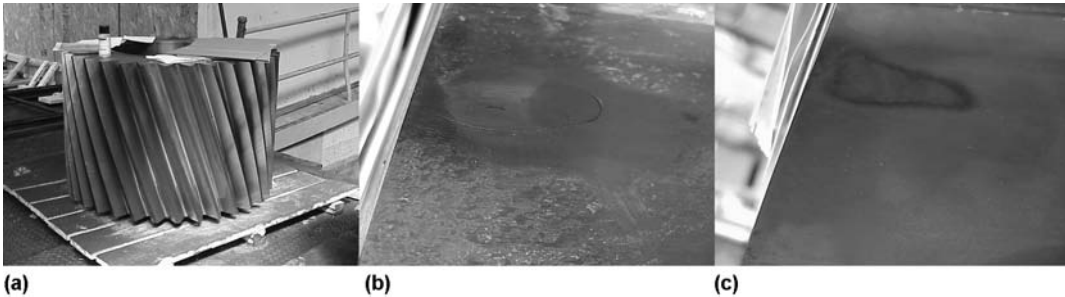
Large gear that showed evidence of cracking. (a) As-received gear. (b) Crack evident on gear face. (c) Region after temper etching showing evidence of abusive grinding
